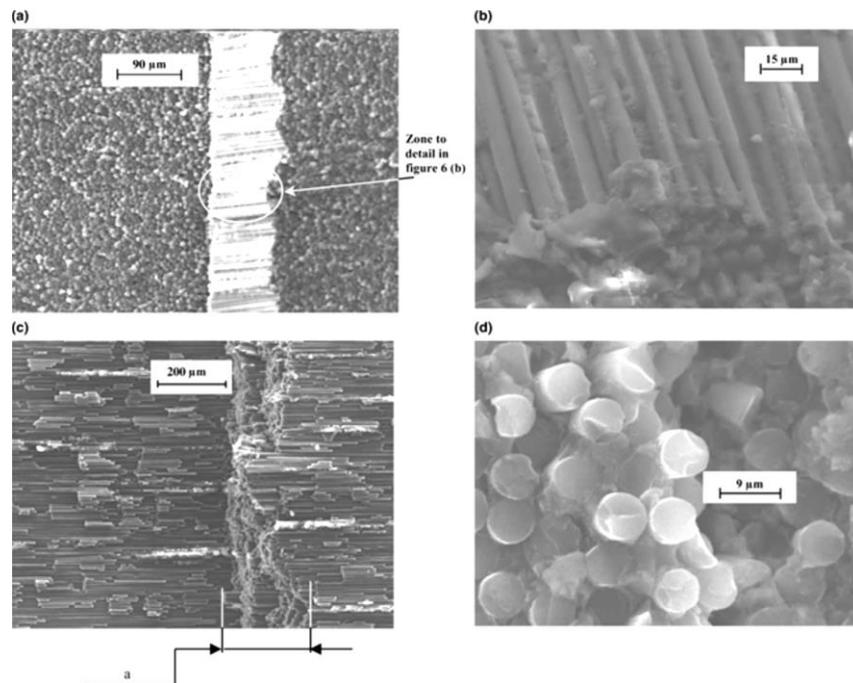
Enlargements of a machined surface with cutting depth $a_p = 0.25 \text{ mm}$: (a) $X_2 = 45^\circ$; (b) enlargement of (a); (c) $X_2 = 0^\circ$; (d) enlargement of (c) [Zitoune, 2004].
